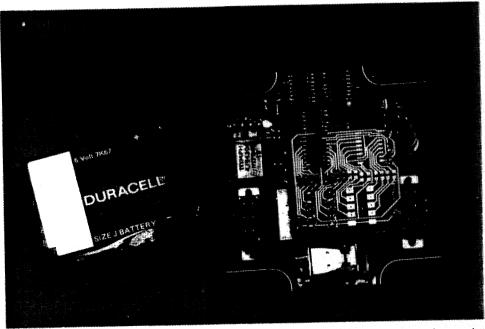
Rear panel and standoffs removed. Wires are soldered directly to the battery. The smalled printed circuit board is visible with only 1 integrated circuit installed and many empty pads. It has no solder mask coating.
